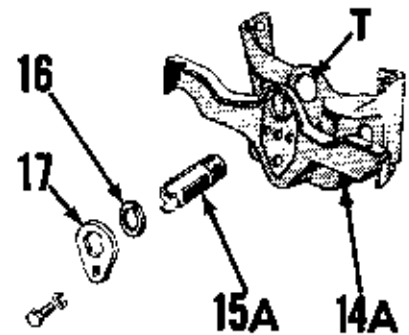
Service installed front support has threads (T) for threaded front axle pivot pin (15A).
